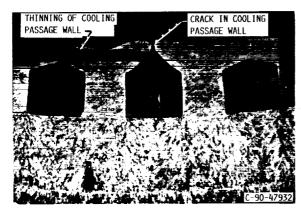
TYPICAL CHANNEL WALL FAILURE.
